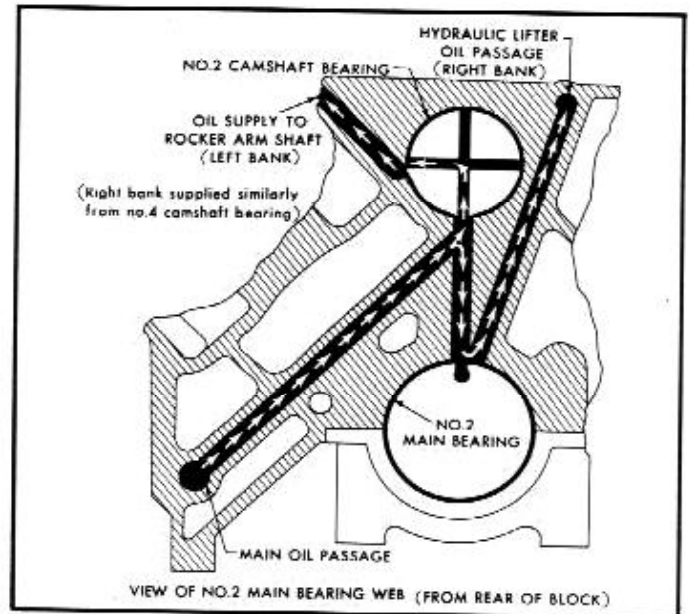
C-7—Lubrication at No. 2 Main Bearing Web
